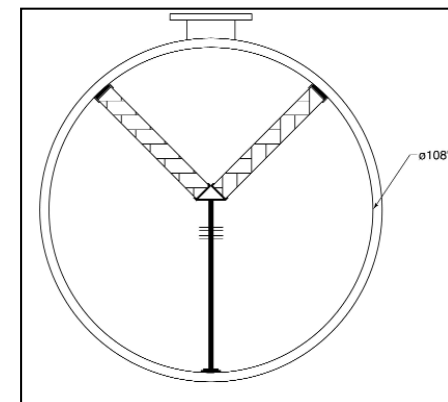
V-Bank housing and mist eliminator in a horizontal vessel, supported with jack-screw legs.
